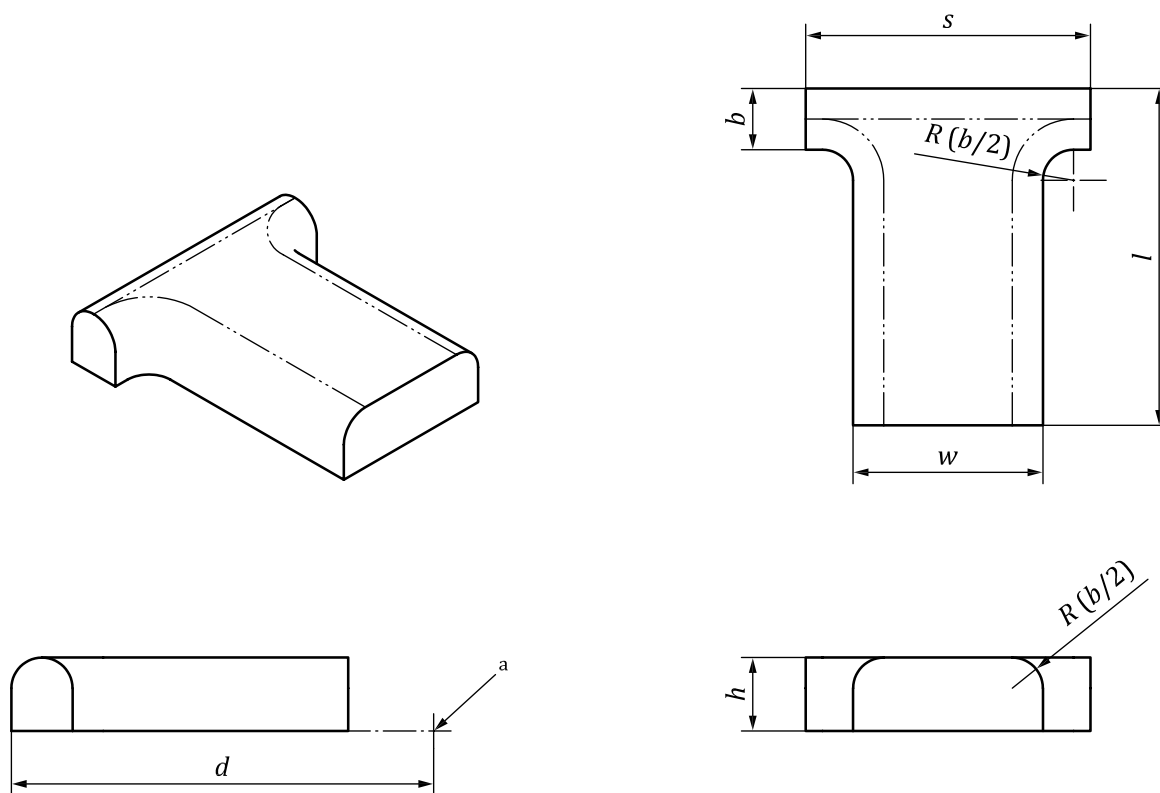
Torso loading pad (dimensions specified in [Table 2](#))
